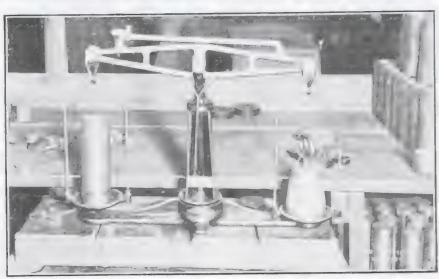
INSPECTION BENCH SHOWING A FRATURE IN THE USE OF A SINGLE WDIGHT TO TAKE THE PLACE OF SEVERAL STANDARD WEIGHTS
